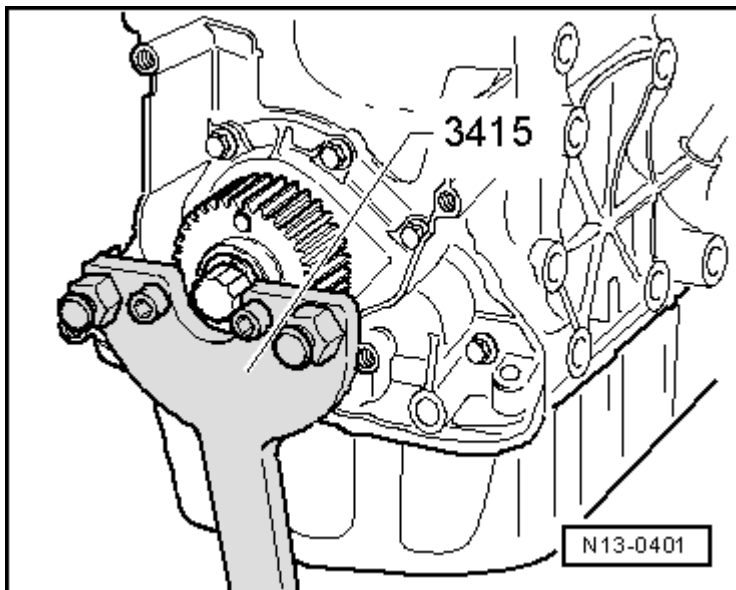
Identifying Counter-Hold 3415 On Crankshaft Toothed Belt Sprocket
